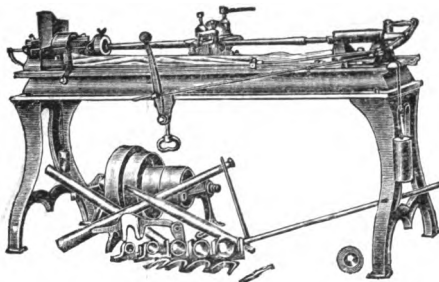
SELF-CENTERING AND DISCHARGING GAUGE LATHE.
